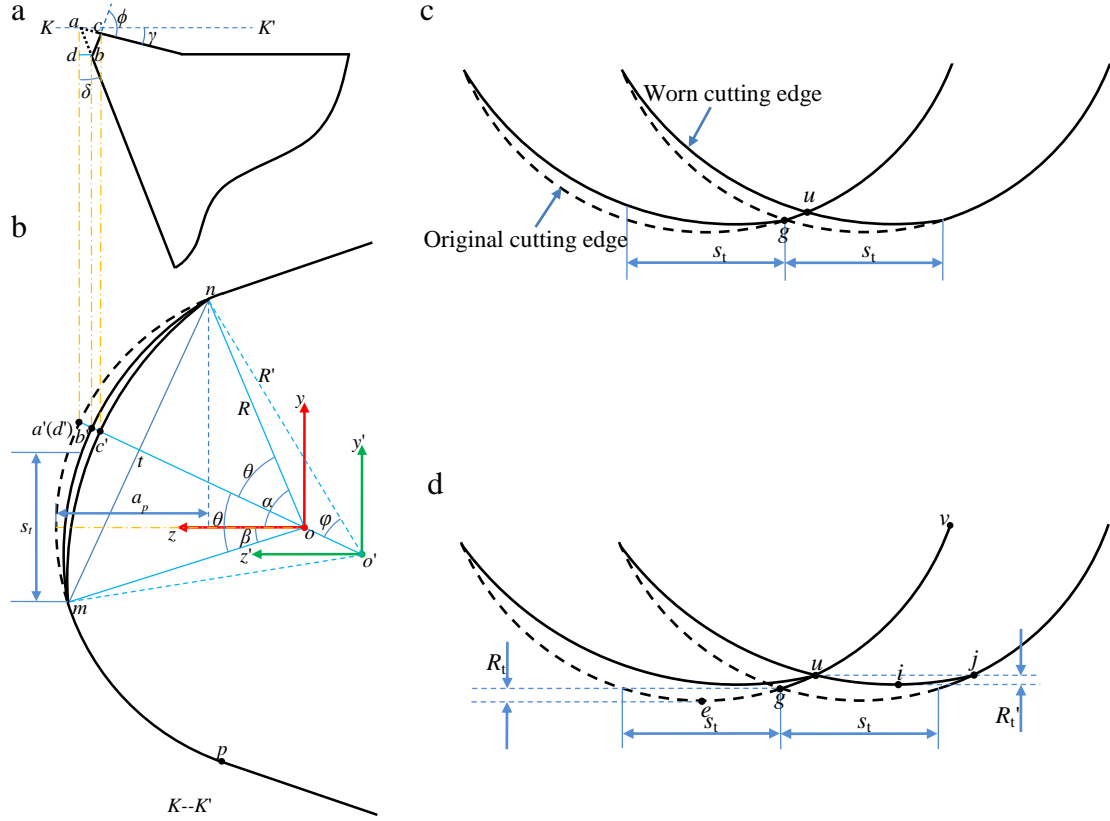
Schematic illustration of the side view (a) and the top view(K--K' plane) (b) of tool flank wear, and the effect of tool flank wear on the surface roughness(c)(d)
